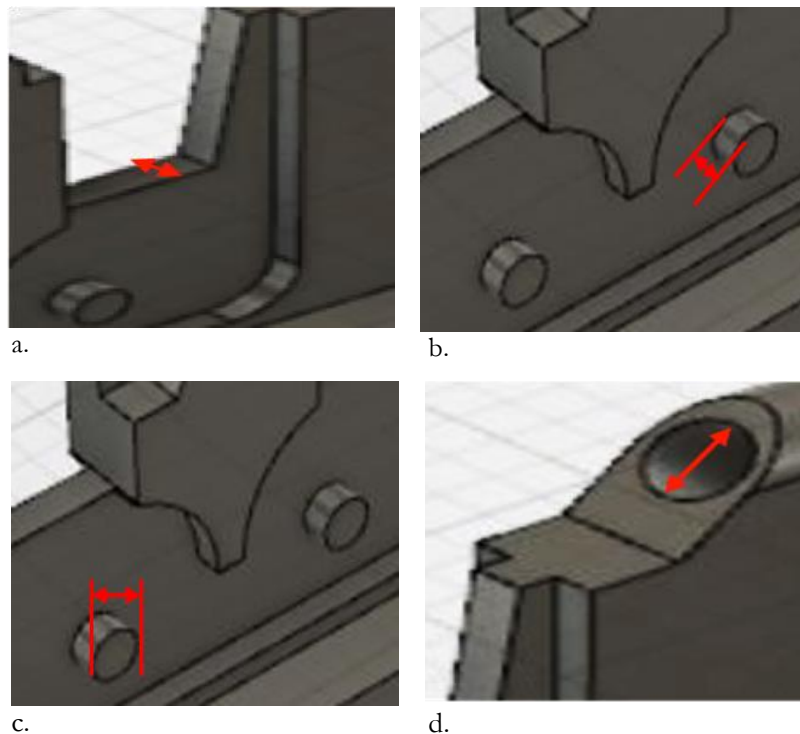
Key quality characteristics of the parts clip body: a. inside diameter of hole; b. outside diameter of locating point; c. height of locating point; d. intermediate thickness.
